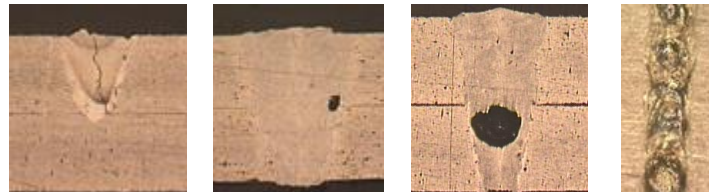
Defects in laser welding (a) Cracking; (b) Porosity; (c) Huge Pores; (d) Instabilities
